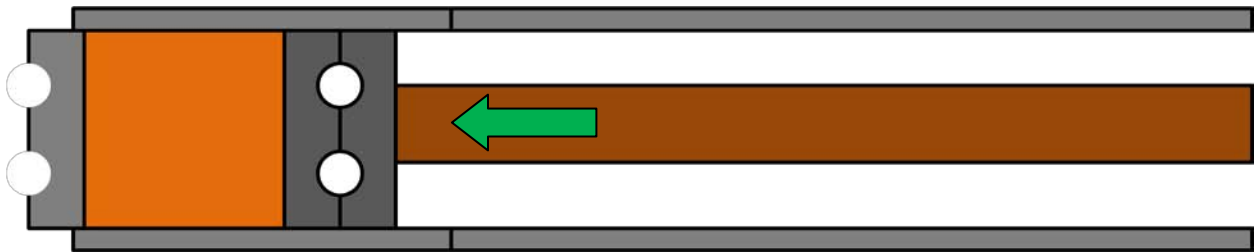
All dowel pins are removed, and the finished cube is pushed out.
